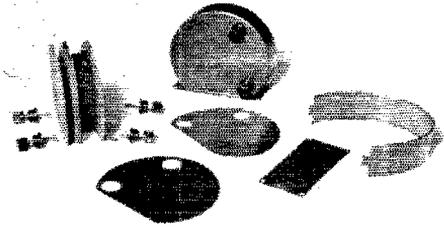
Assembled and “Exploded” Adams Transformers. (Photo by 3AR).
